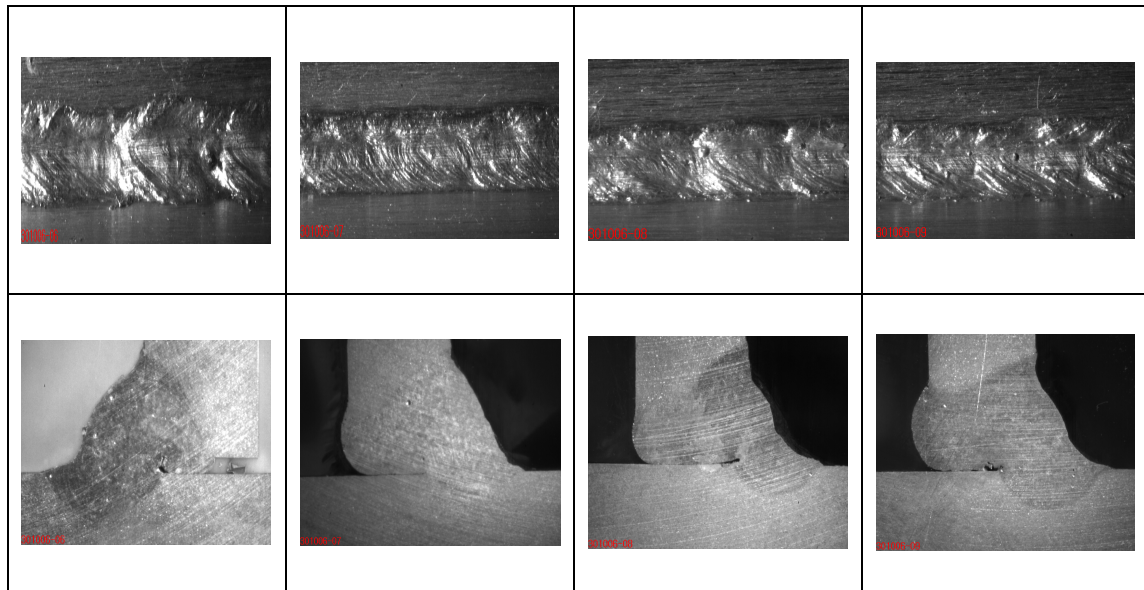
Bead shapes&Cross-section of fillet joints by Hybrid welding gap bridging ability(Laser power:3KW/194A/23.2V/Welding speed:1m/min/ combine angle:55°/Ar:20L/min/WFS:6m/min)
